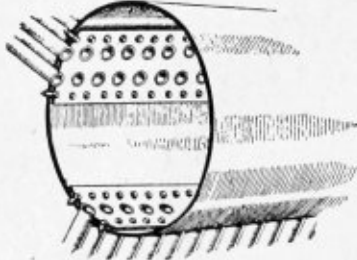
(Case No. 337) Reinforcing Plates in Drum of Watertube Boiler
